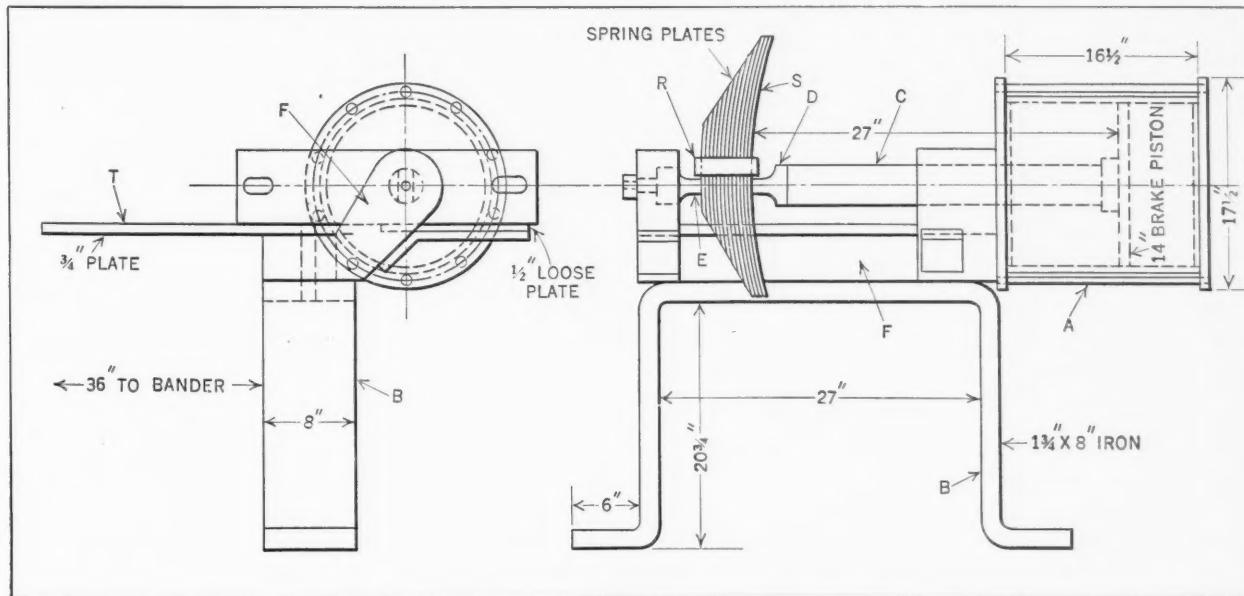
Machine for Pressing together the Plates *S* of a Locomotive Spring to Permit Placing the Hot Steel Band *R* in Position
